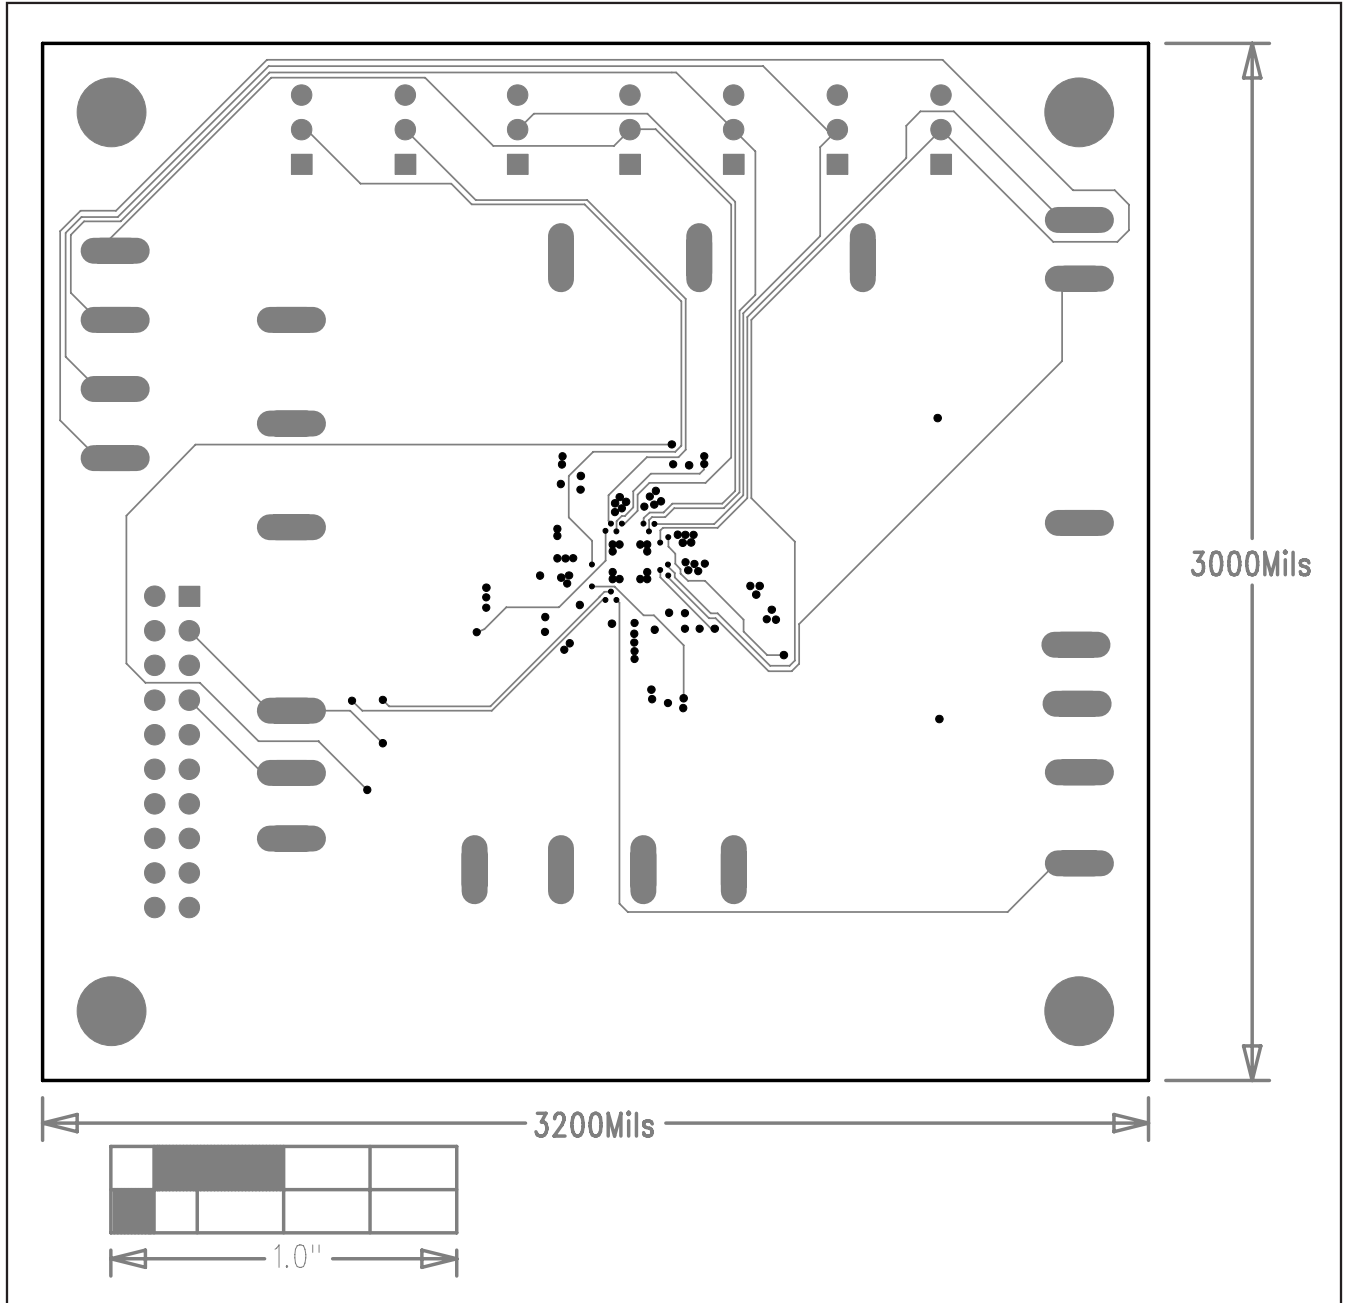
MAX8660 EV Kit PCB Layout—Digital Layer 2
